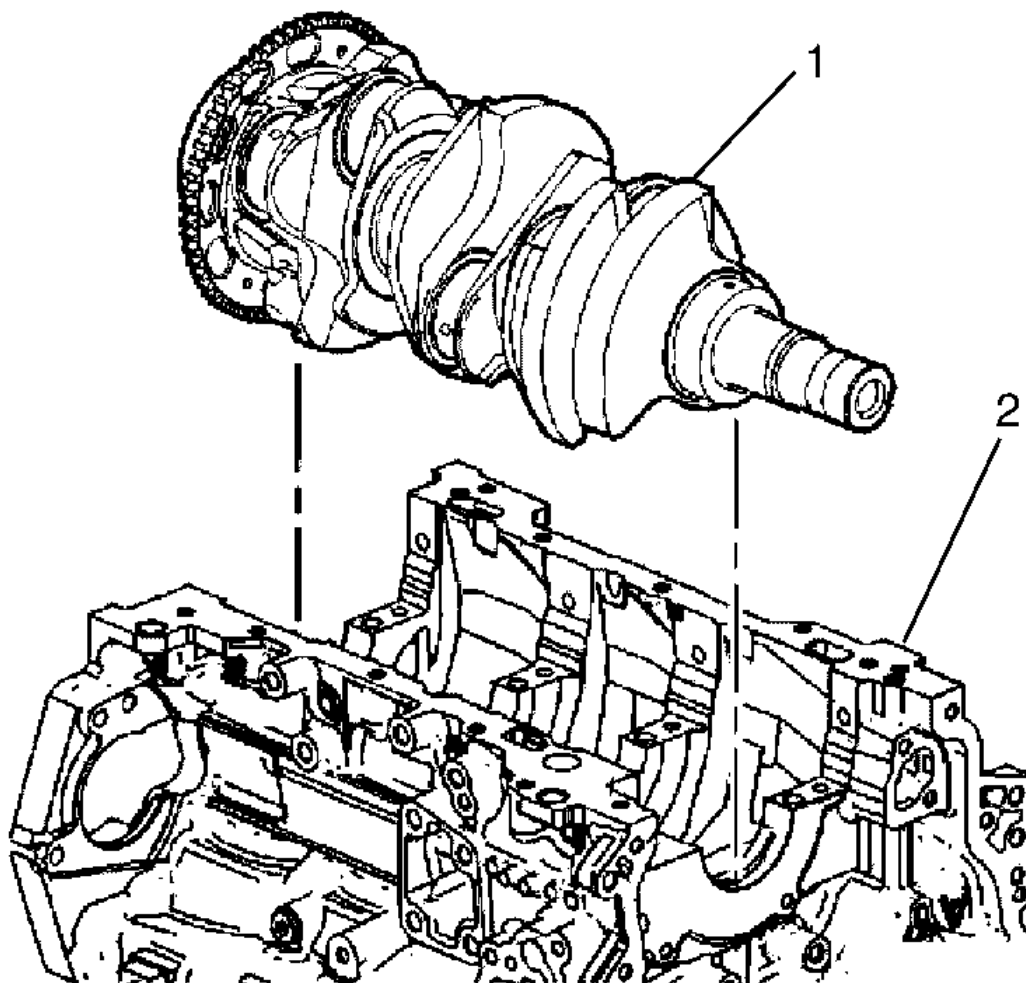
View Of Crankshaft Bearing Clearance
